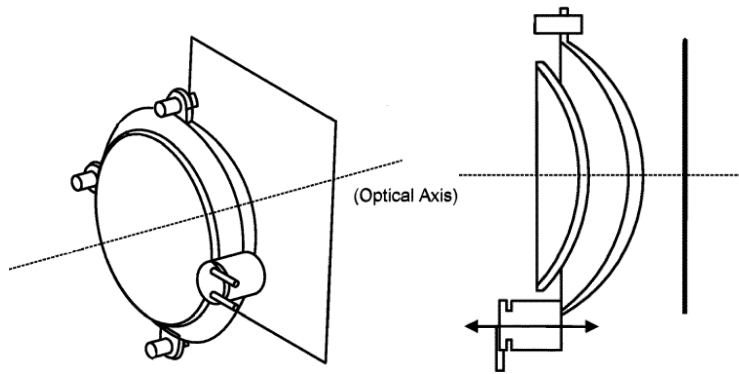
Motorized focusing technique utilizing guide shafts and motor [53].
